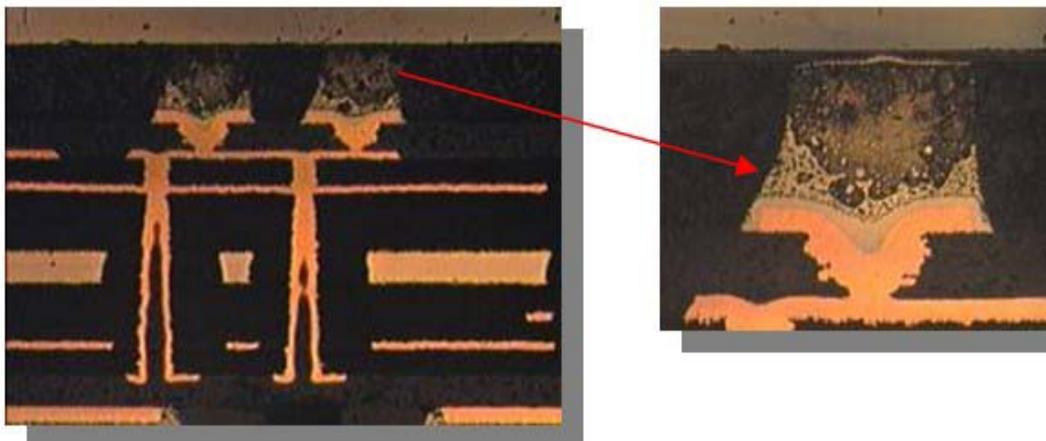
Cross-Section of the 2577 I/O BGA High-Pb Flip Chip Bump Using Sn63/Pb37 Solder attach to PTFE Via-In-Pad
